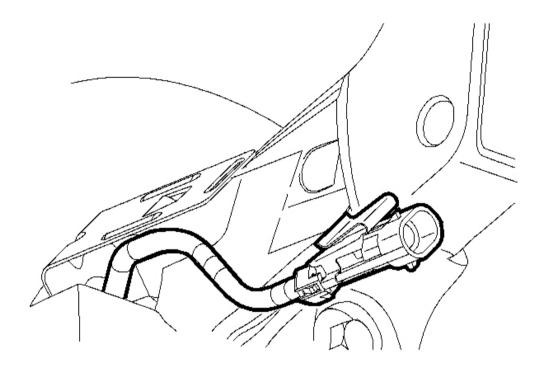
Wheel Speed Sensor Electrical Connector & Connector Bracket Courtesy of GENERAL MOTORS CORP.
